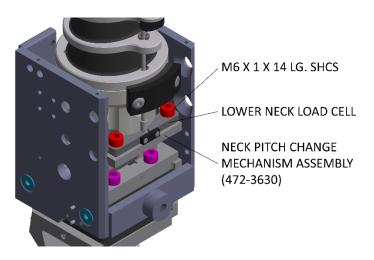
Secure Lower Neck Load Cell to Neck Pitch Change Mechanism Assembly
